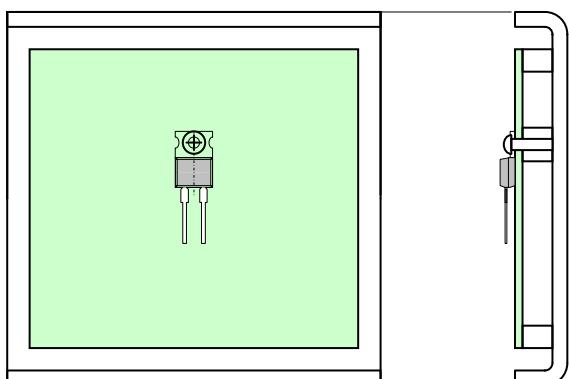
Typical installation. Flanged resistor is mounted on circuit board and resistor heating will transfer to case or chassis thru a screw.
